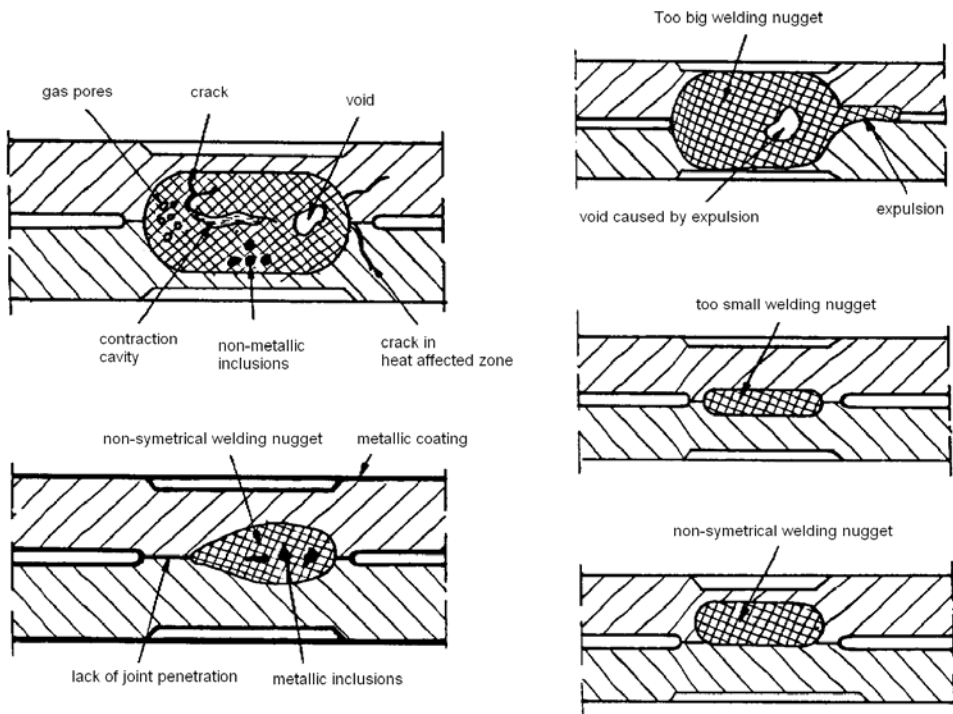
Typical flaws in spot welding joints [9]
